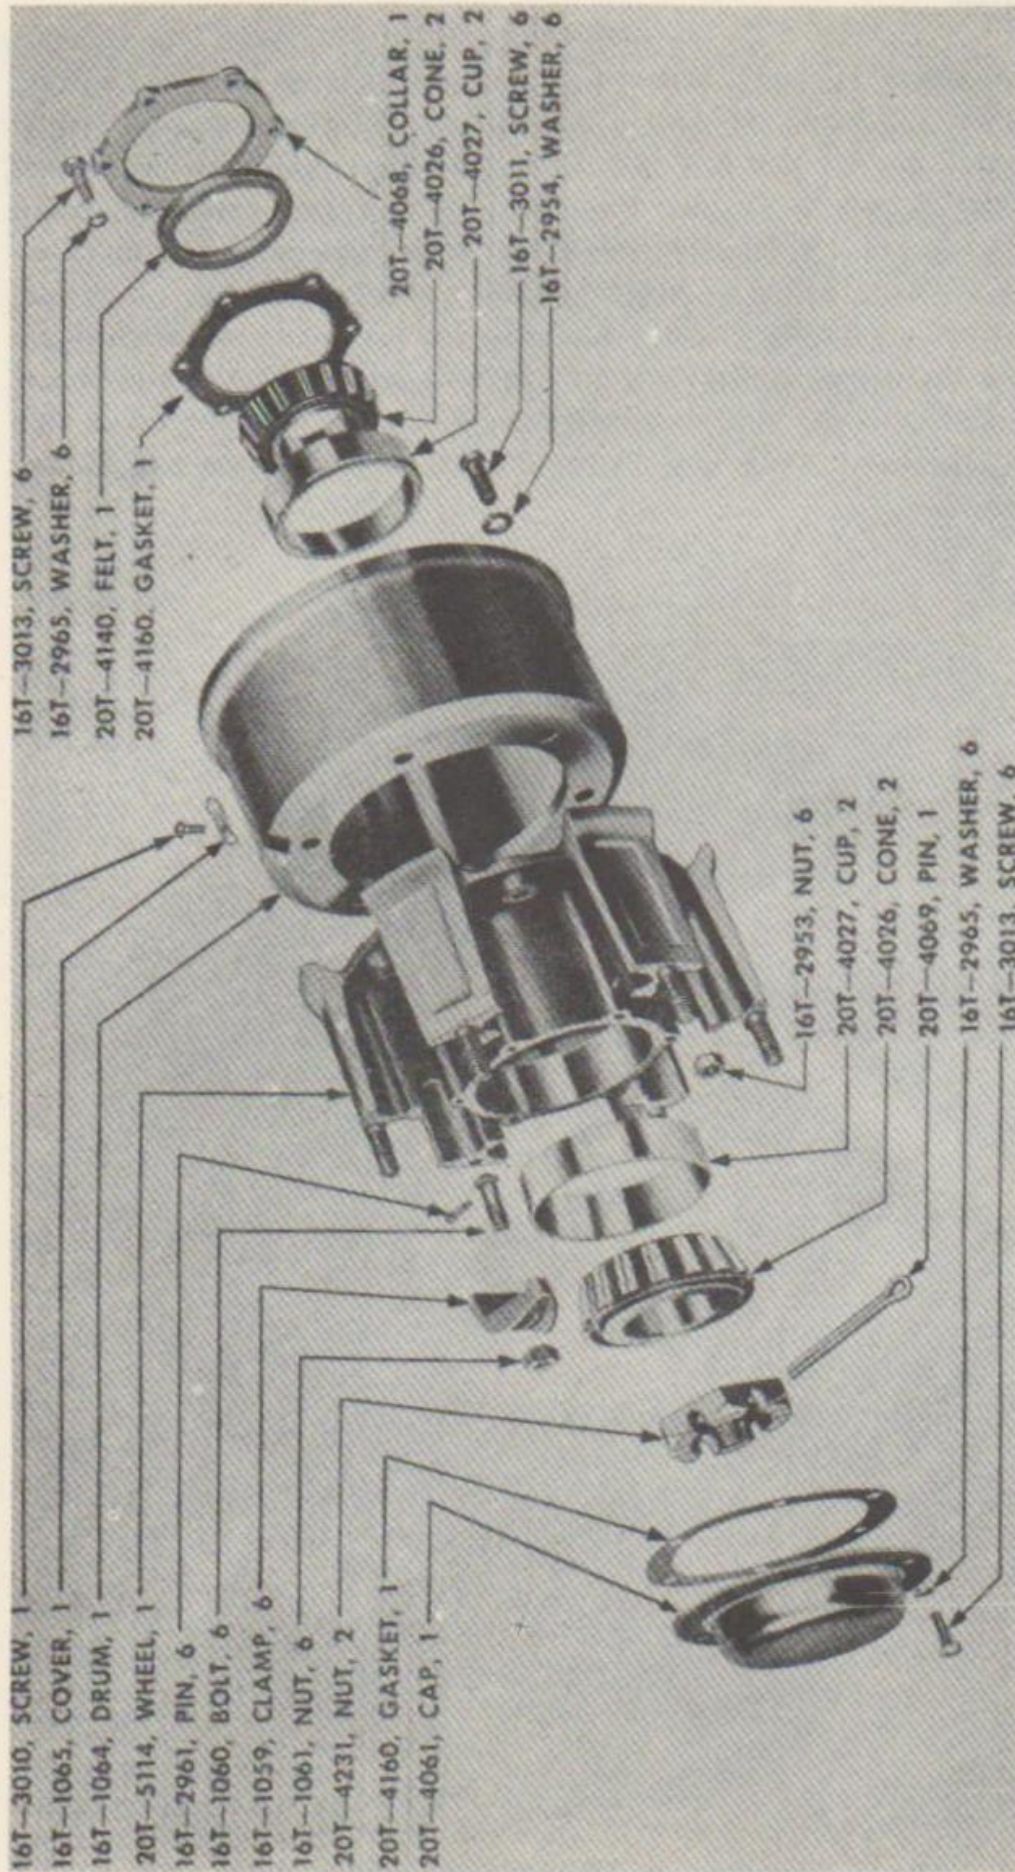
DOLLY WHEEL AND DRUM ASSEMBLY—EXPLODED VIEW
